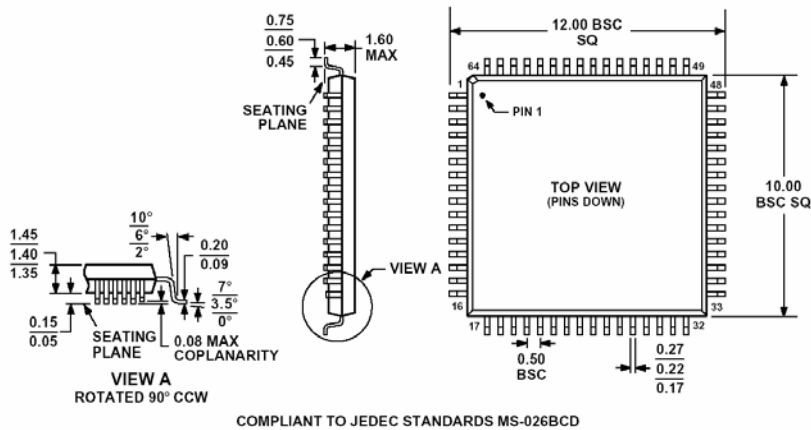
64-Lead Low Profile Quad Flat Package [LQFP] (ST-64)
